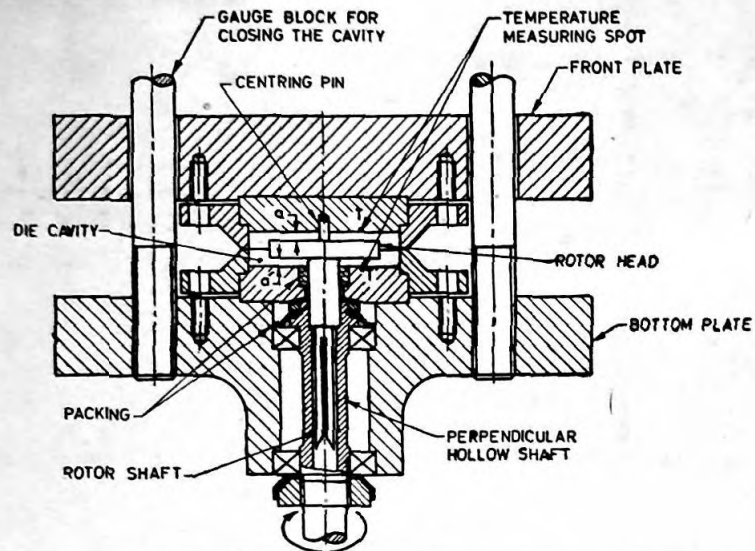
ESSENTIAL PARTS OF THE SHEARING DISK VISCOMETER
